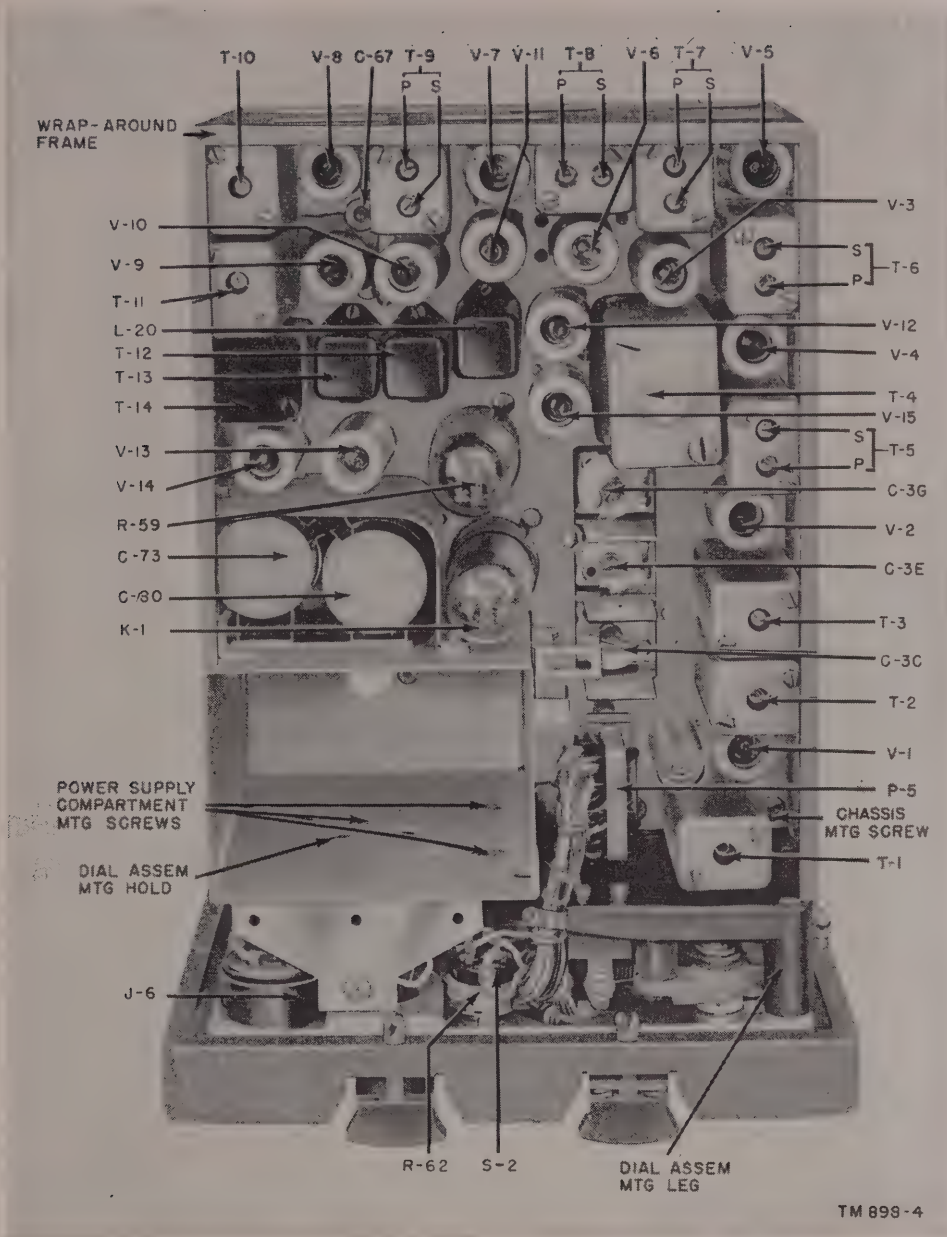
Auxiliary receiver panel-chassis assembly, top view.
